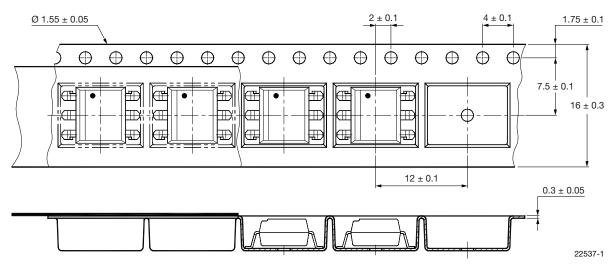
Tape and Reel Drawing, 1000 Units per Reel
